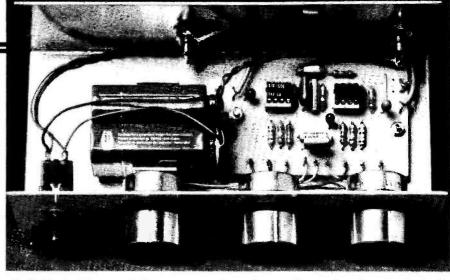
The prototype was built as a mono version and mounted on an aluminium chassis. If built as part of an amplifier the battery power supply could be replaced with a well smoothed 9.0-9 mains PS.
